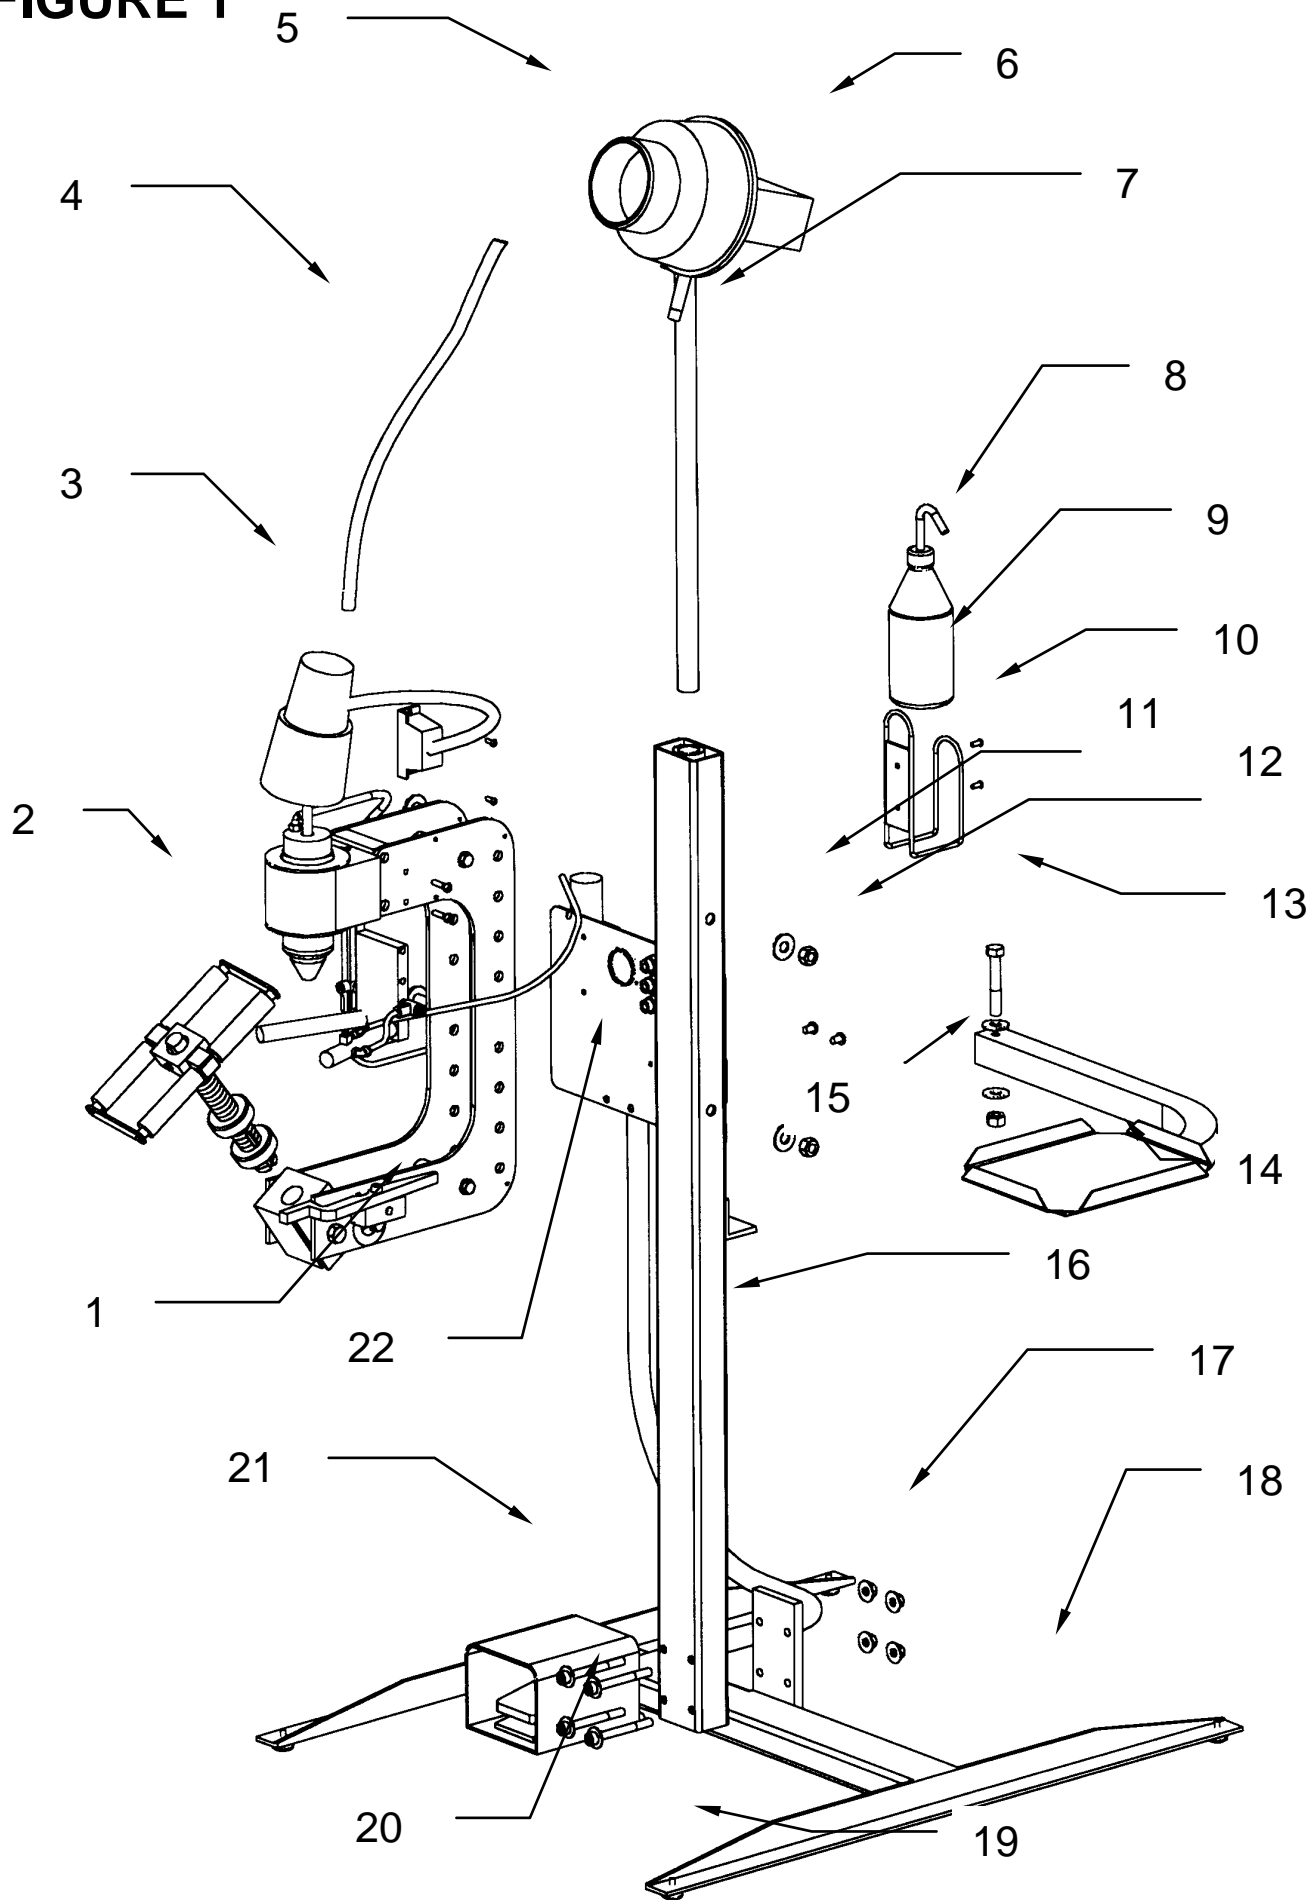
SATSIM ASSEMBLY BREAKDOWN
